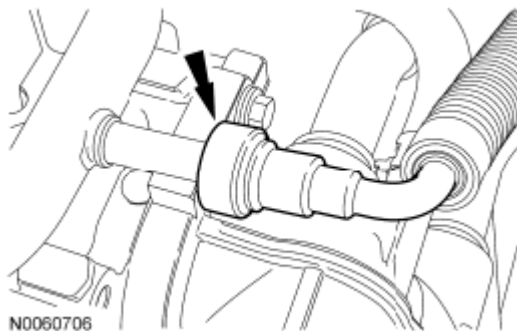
Locating Fuel Supply Tube From Fuel Rail
